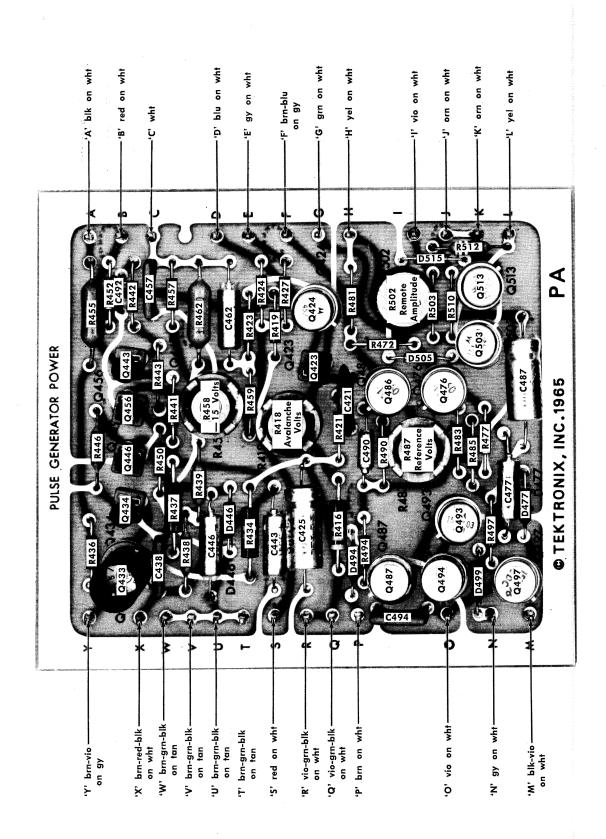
Pulse-Generator Power Supply etched-wiring board.
